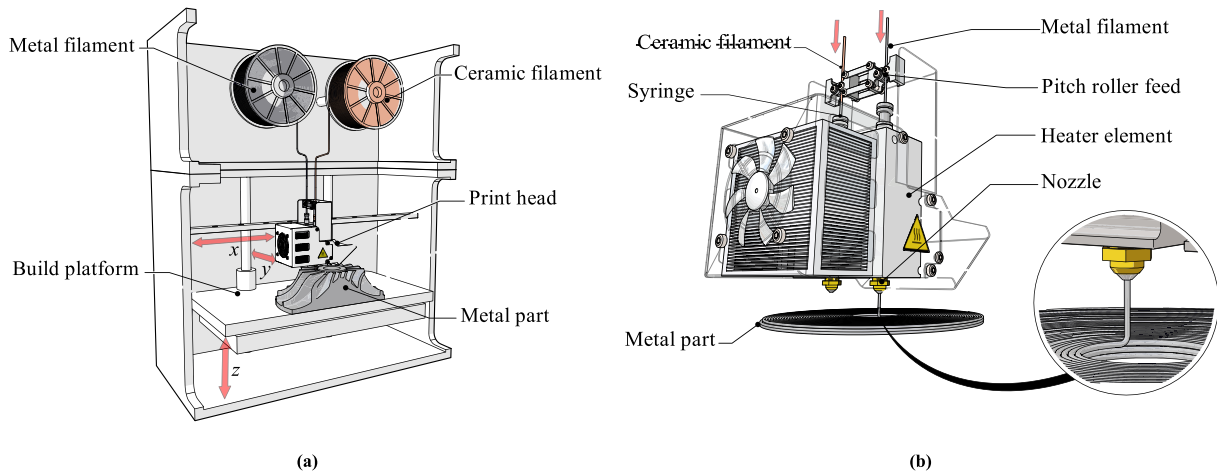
(a) Schematic of a ME machine (b) Schematic of a typical ME print head mechanism.
